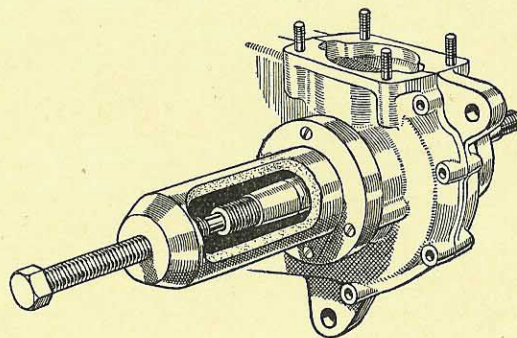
EXTRACTOR FOR SEPARATING CLUTCH-CASE.
